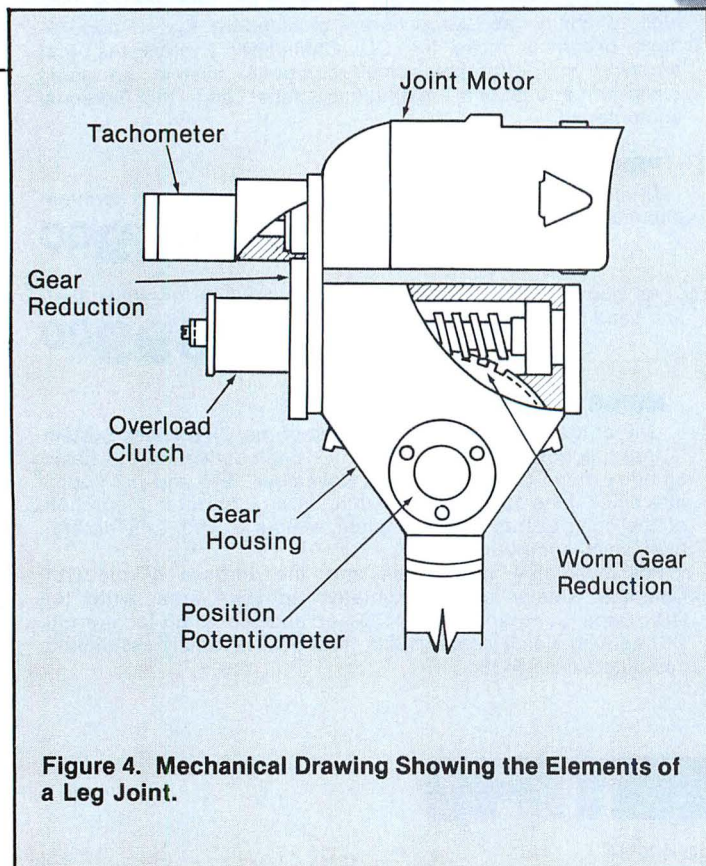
Mechanical Drawing Showing the Elements of a Leg Joint.
